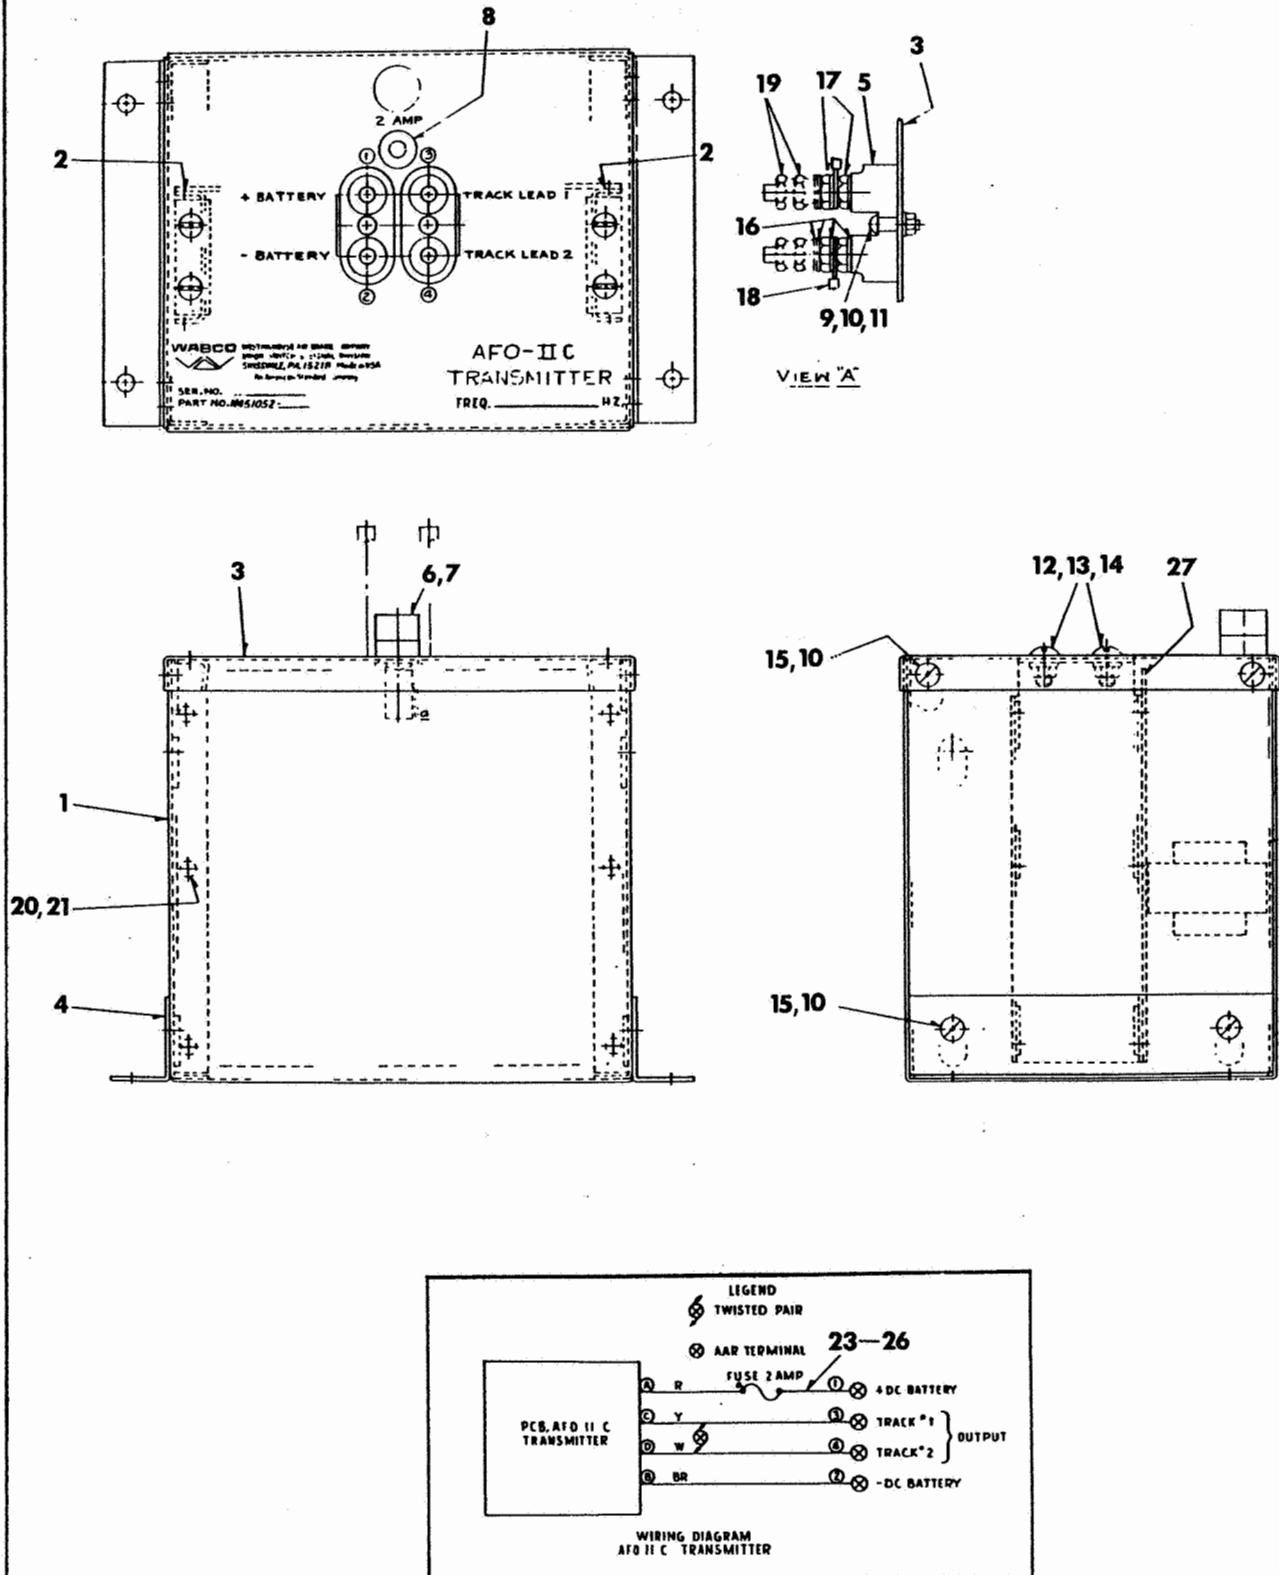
AFO-IIC Transmitter Basic Assembly and Chassis Wiring
